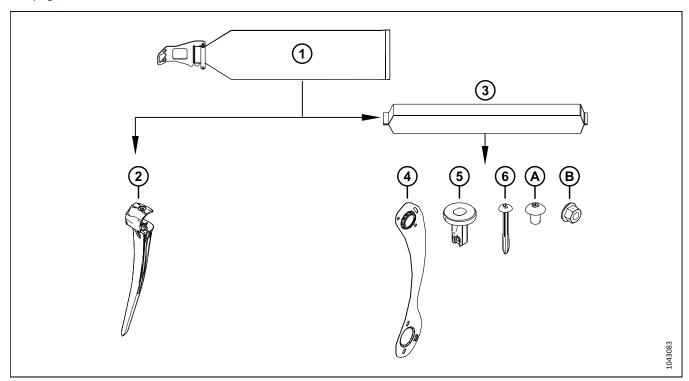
Six-Bat Reel Endshield Parts Bag MD #368323
